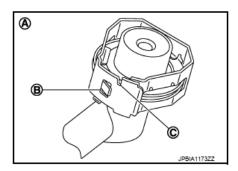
Identifying Opening And Slit Of Clip Courtesy of NISSAN MOTOR CO., U.S.A.
